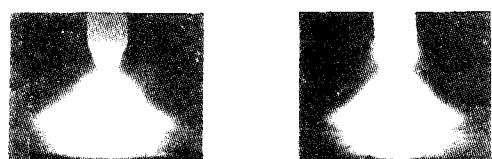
Evaluation of welding stability by using welding current and heat input
